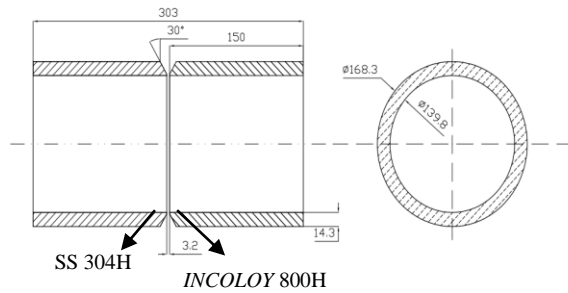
Welding scheme of dissimilar metal SS 304H with incoloy 800H
